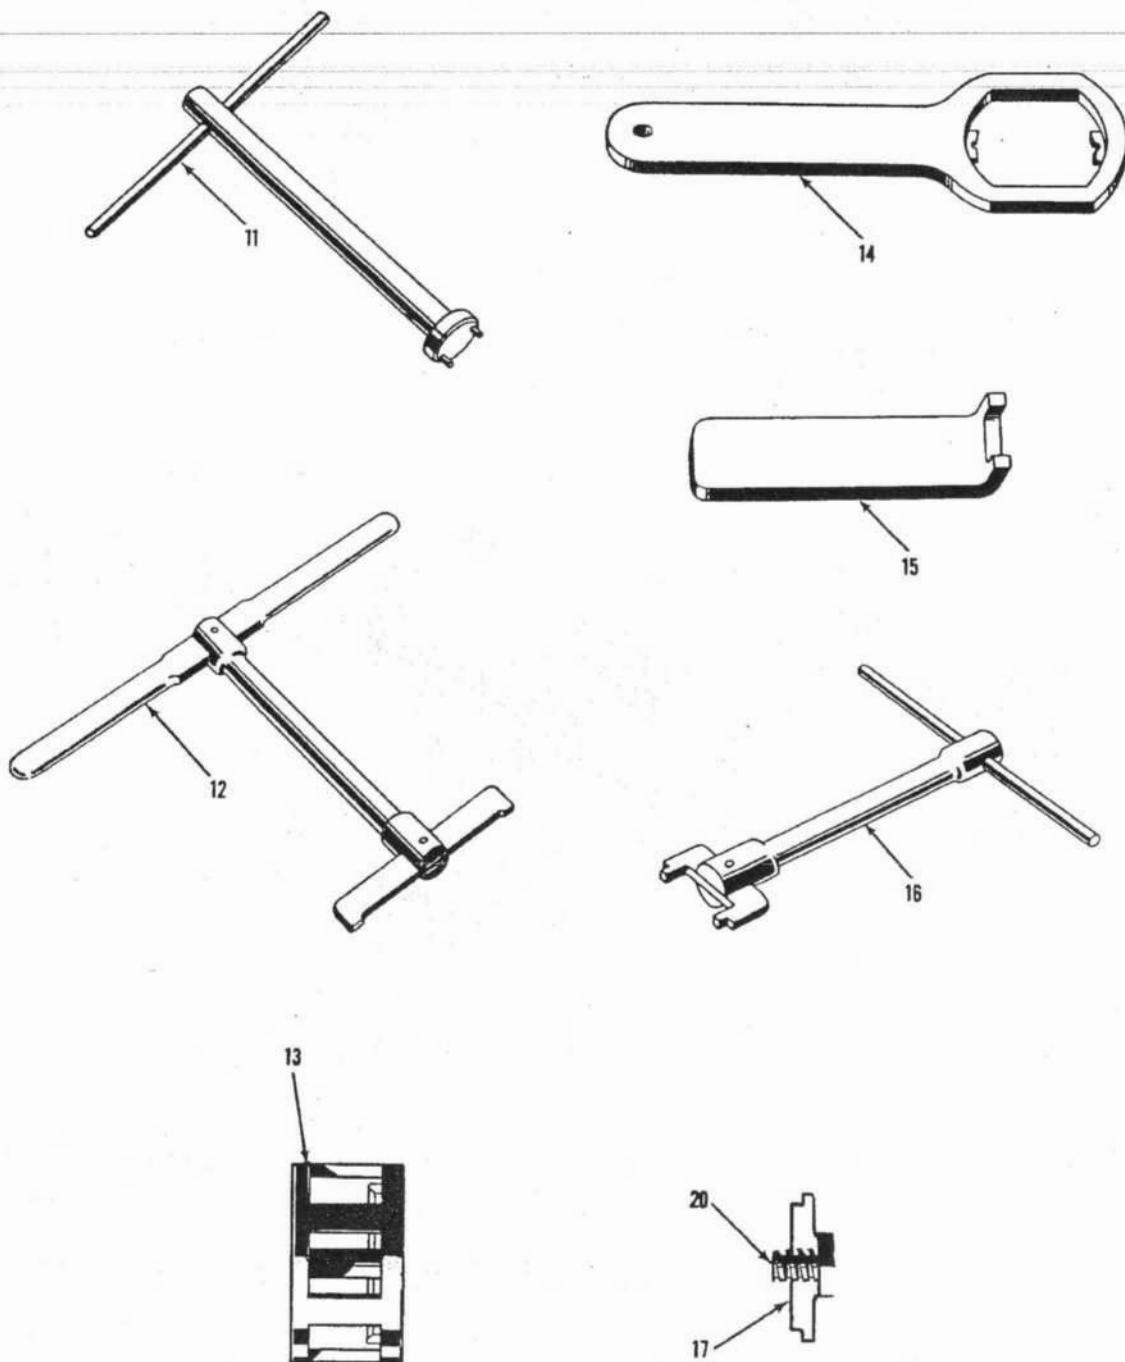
20 MM A.A. Guns and Mounts Special Tools
